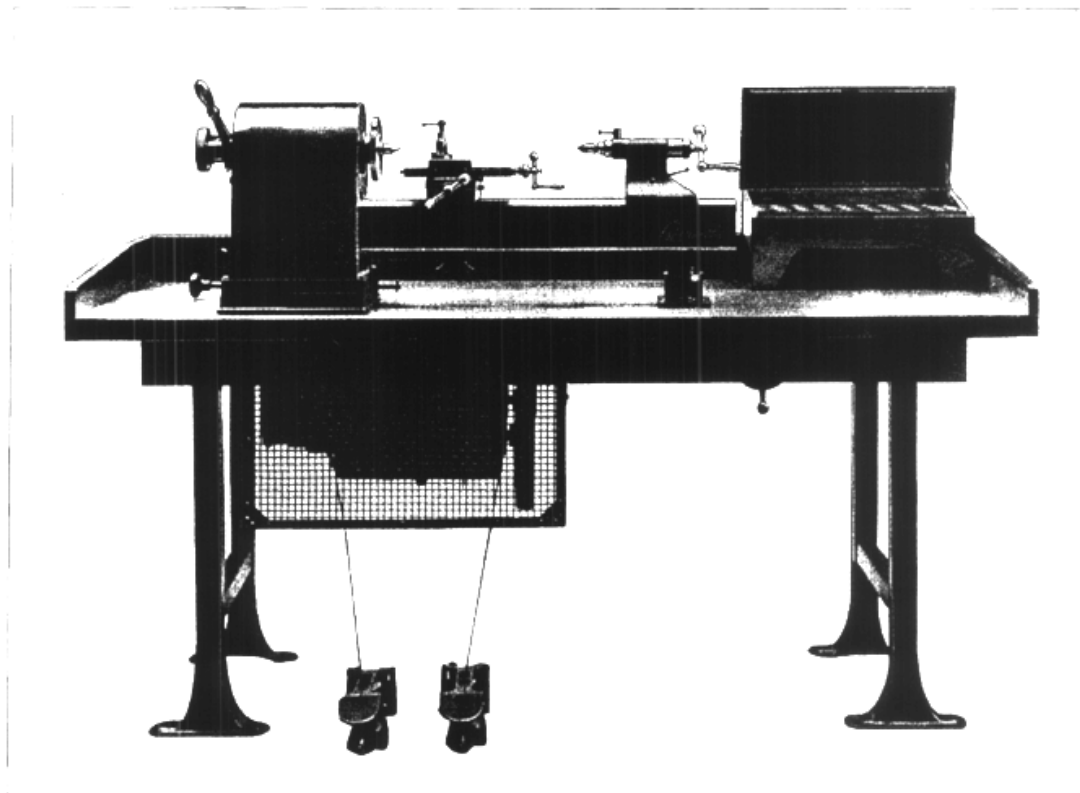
Rivett Series 505 Lathe, enclosed head type, on Unit Bench with Collet Box, Speed Box Motor Drive, Screen Guard, Jack Pedestals and Latch Treadles
